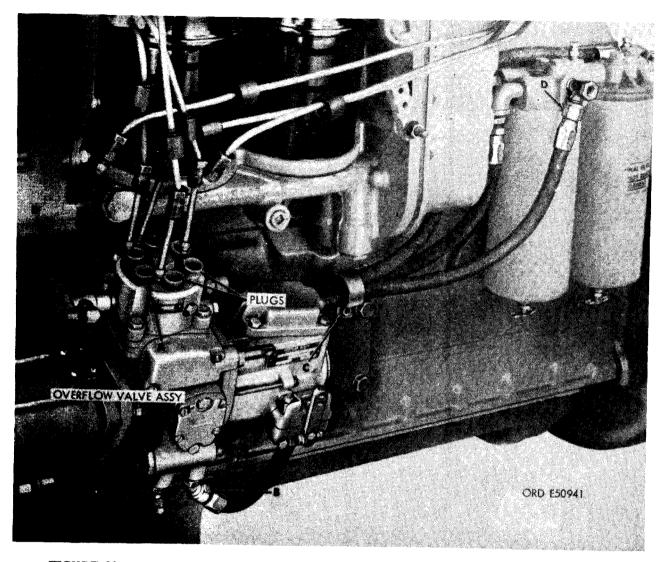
DISCONNECTING OR CONNECTING FUEL HOSES FROM FUEL INJECTION PUMP ASSEMBLY AND FUEL FILTER ASSEMBLY (EARLY MODEL ENGINES).
